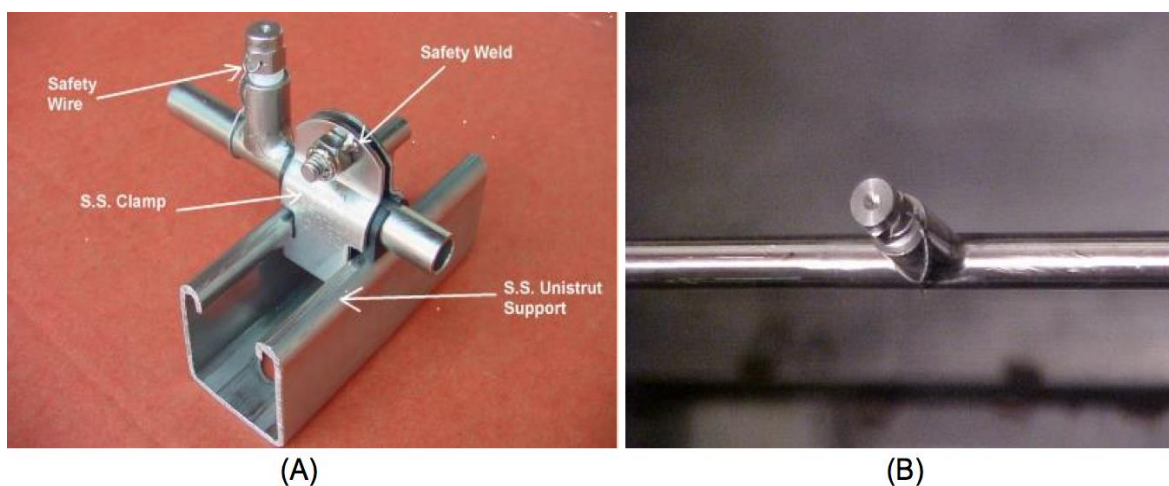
Nozzle mechanical integrity (A): Nozzle clamp, (B): Nozzle tube
